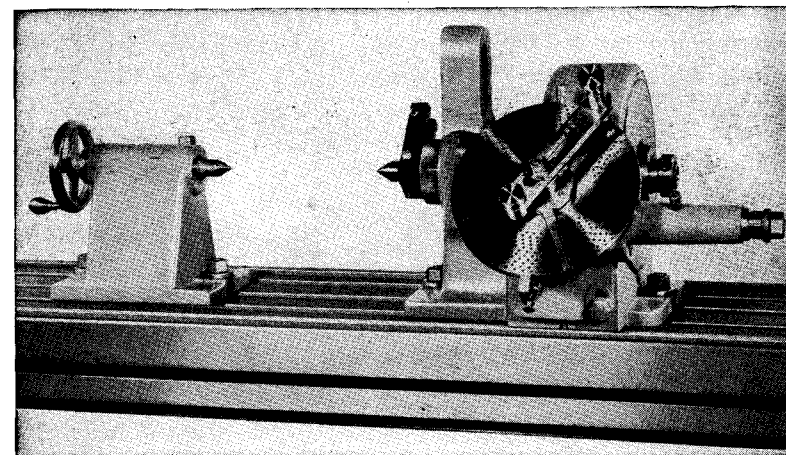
The spiral-milling head. (The Cincinnati Milling Machine Company)
